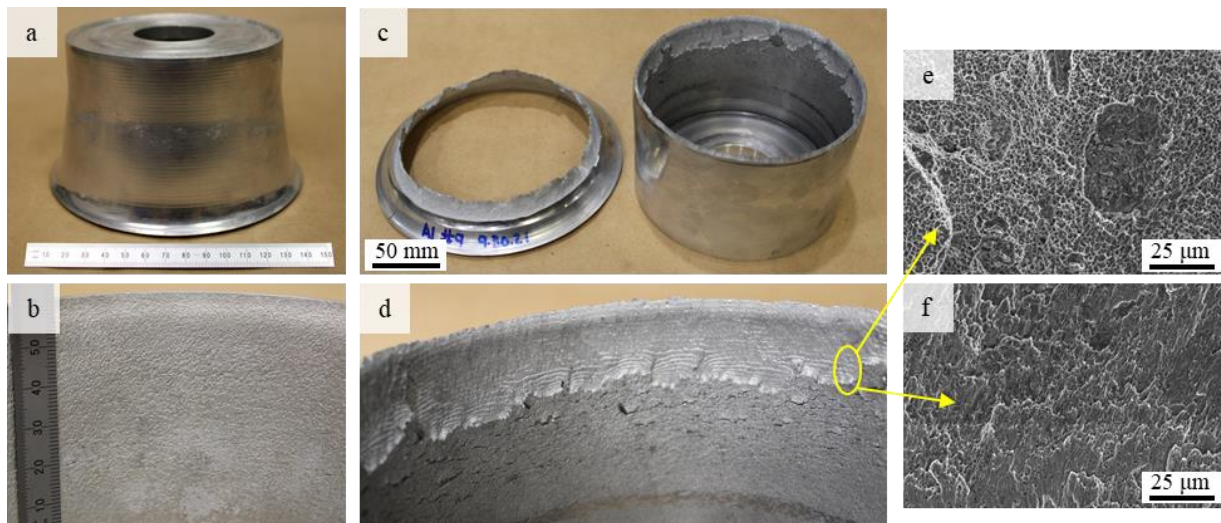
Al 2139 spin forming results, including (a) a part spin formed with 5 of 6 passes, with (b) orange peel and microcracks on the IML. (c) An additional spin forming pass caused flange failure, with (d) beachmarks appearing on the fracture surface. Beachmarks were comprised of alternating regions of (e) dimples and (f) shear features.
